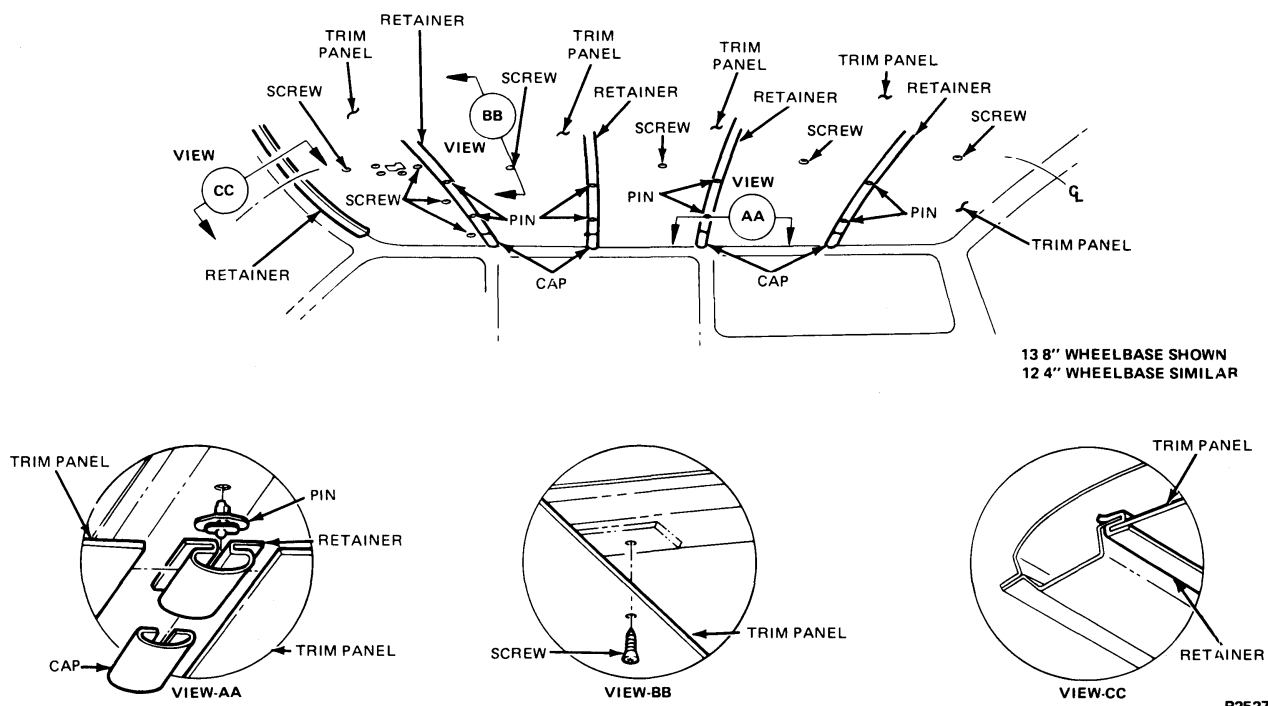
Roof Trim Panels—E-100—E-350—124\" Wheel Base Shown—Others Typical
